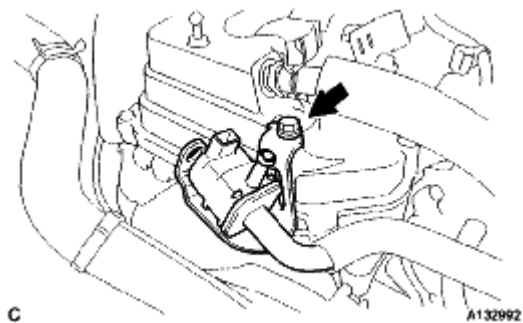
Removing Bolt And No. 1 Vacuum Switching Valve
